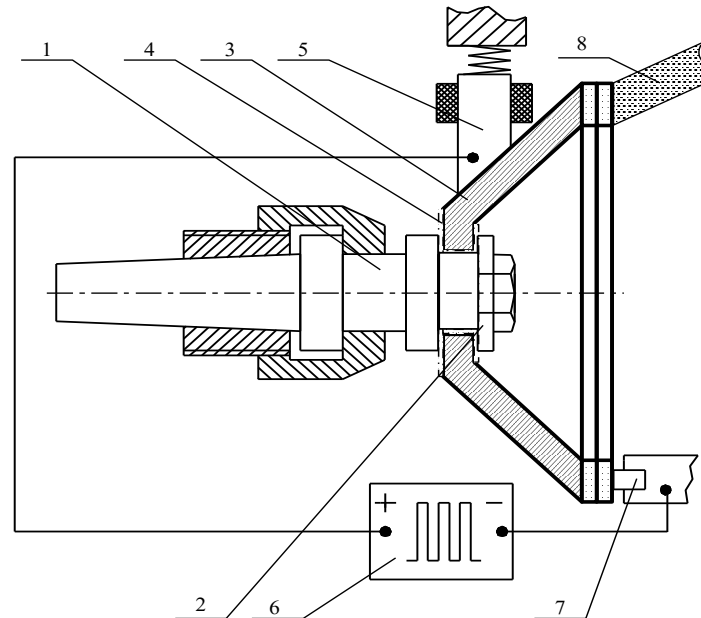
Upgraded system "machine - device - tool - workpiece" for researching the process of diamond spark grinding: 1 – machine spindle; 2 – details for fastening the wheel; 3 – diamond wheel framework; 4 – dielectric coating; 5 – current lead brush; 6 – pulse generator; 7 – processed insert (plate); 8 – solid lubricant
